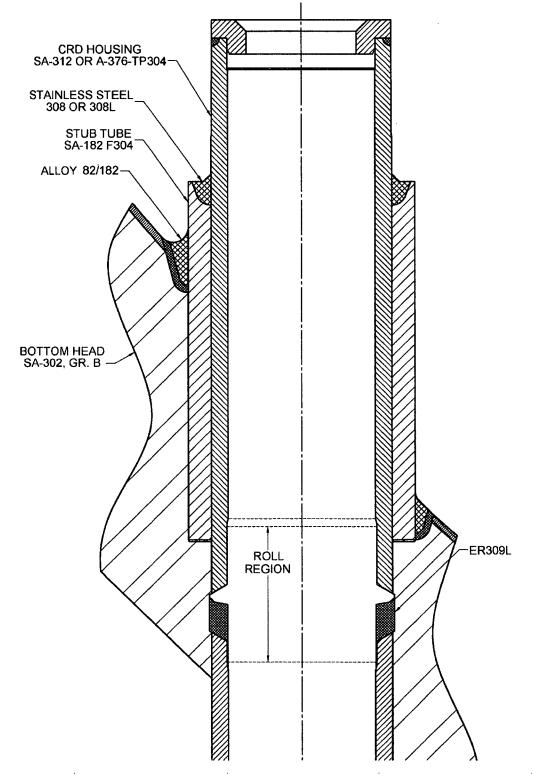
Dissociated BWRVIP-58-A CRDH Internal Access Weld Repair
